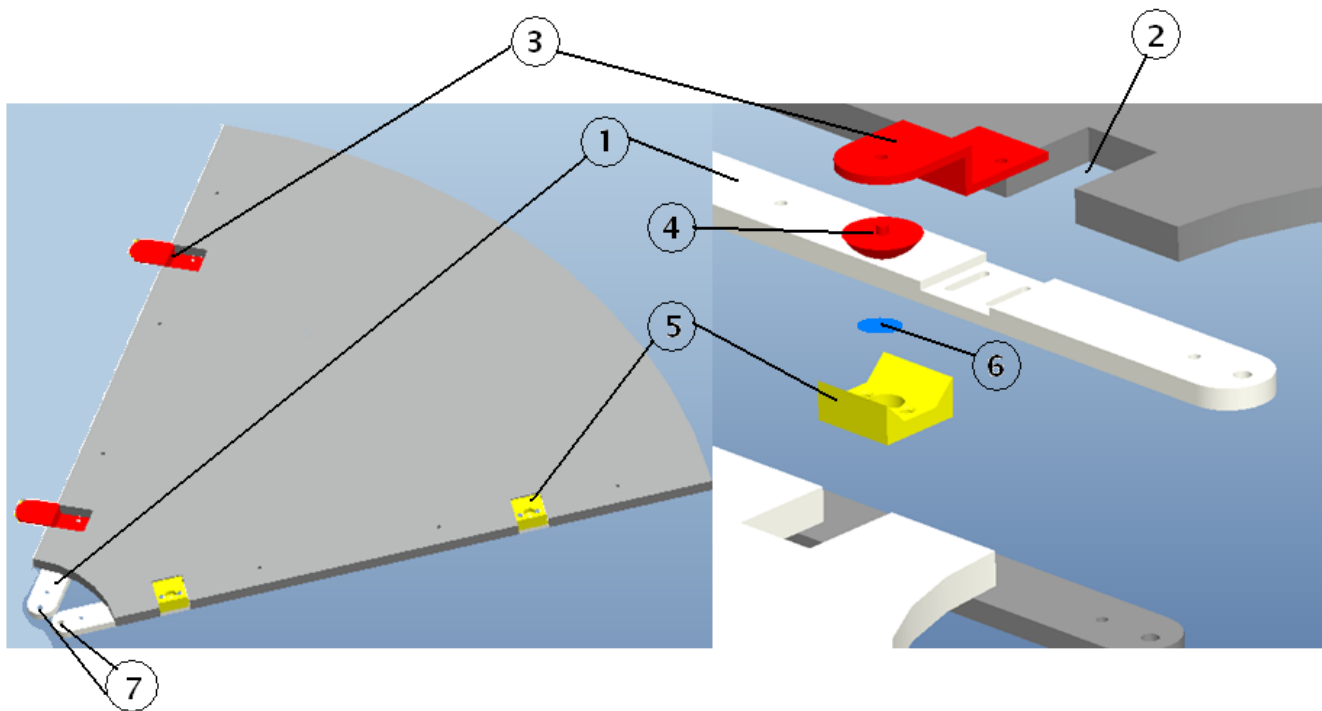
SHOWS THE VARIOUS COMPONENTS OF OUR DESIGN. THE COMPONENTS ARE NUMBERED FOR EASIER ASSEMBLY.
